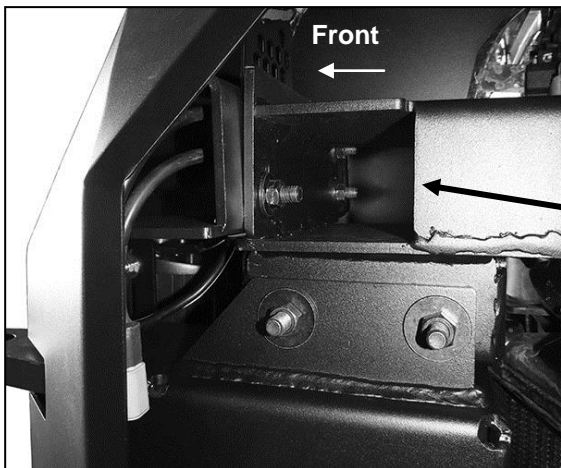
Sensor assembly attached to sensor sleeve on back of Bumper
